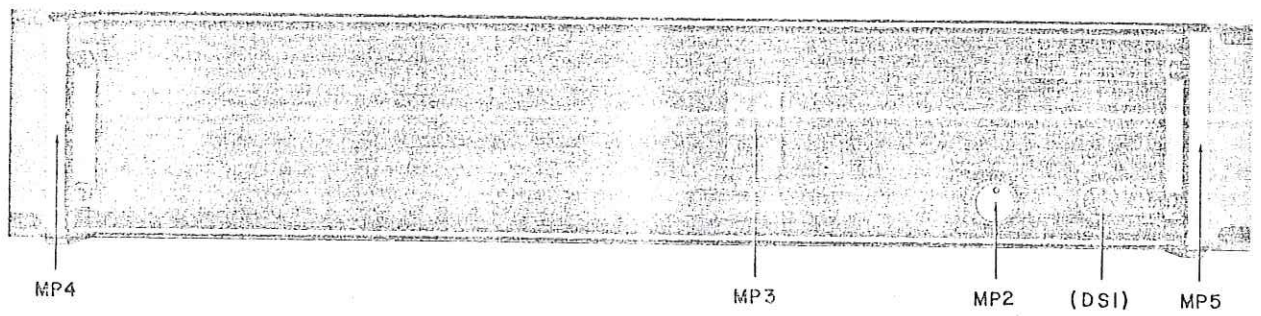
Type MTF-102A Microwave Tuning Frame, Front View, Location of Components.
